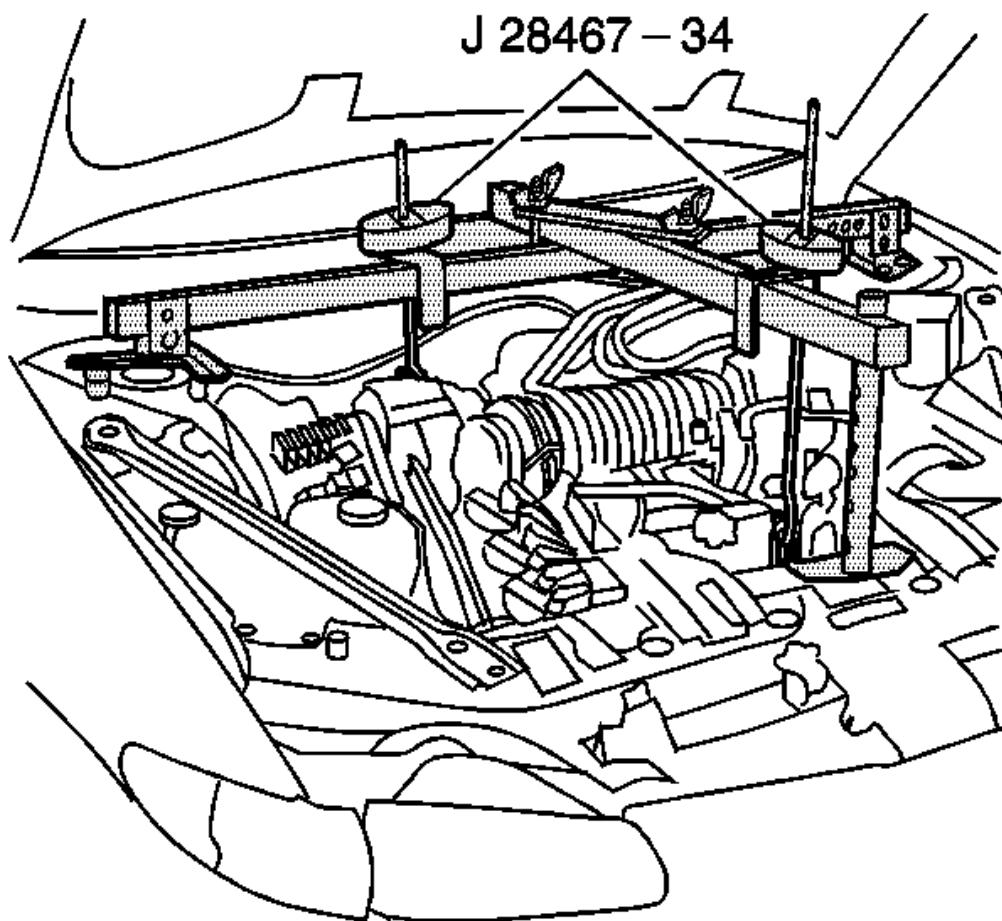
Removing Slack From Engine Support Fixture Assembly
